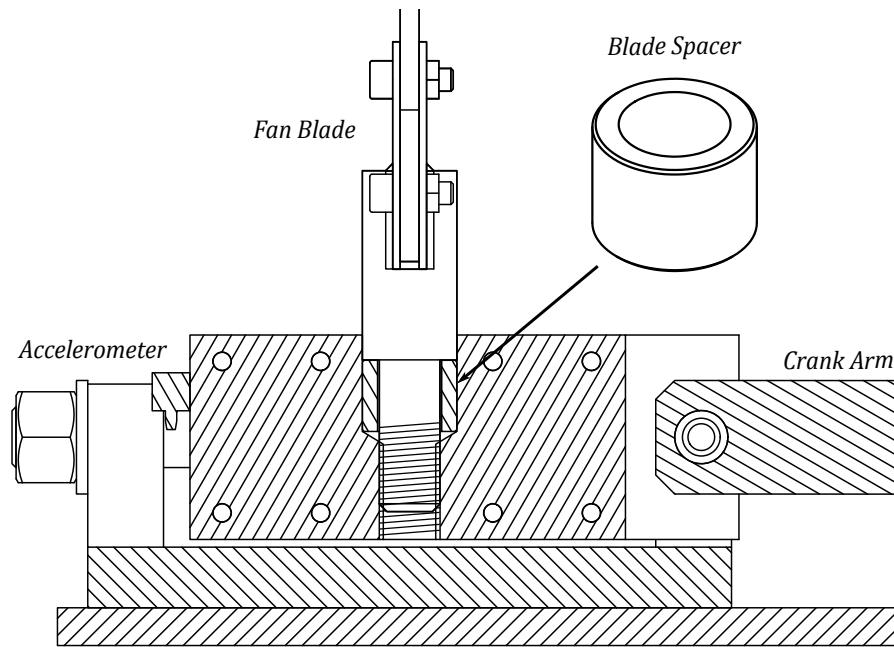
Sectioned view of base excitation mechanism assembly and un-sectioned fan blade, illustrating fan blade locational fit.
